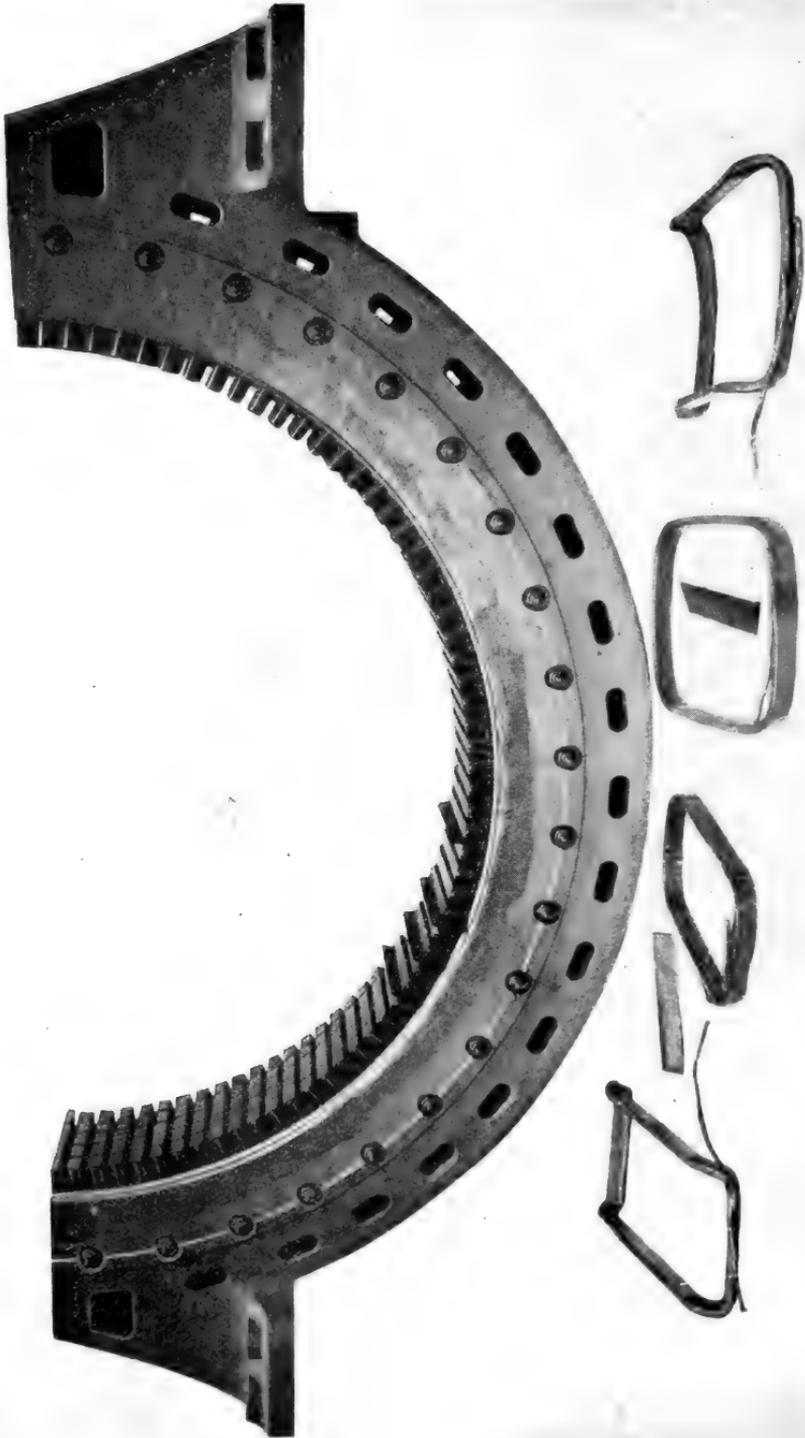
Lower half of complete Assembled Core of large Generator, showing some of its former Wound Coils. Dick, Kerr & Co.
